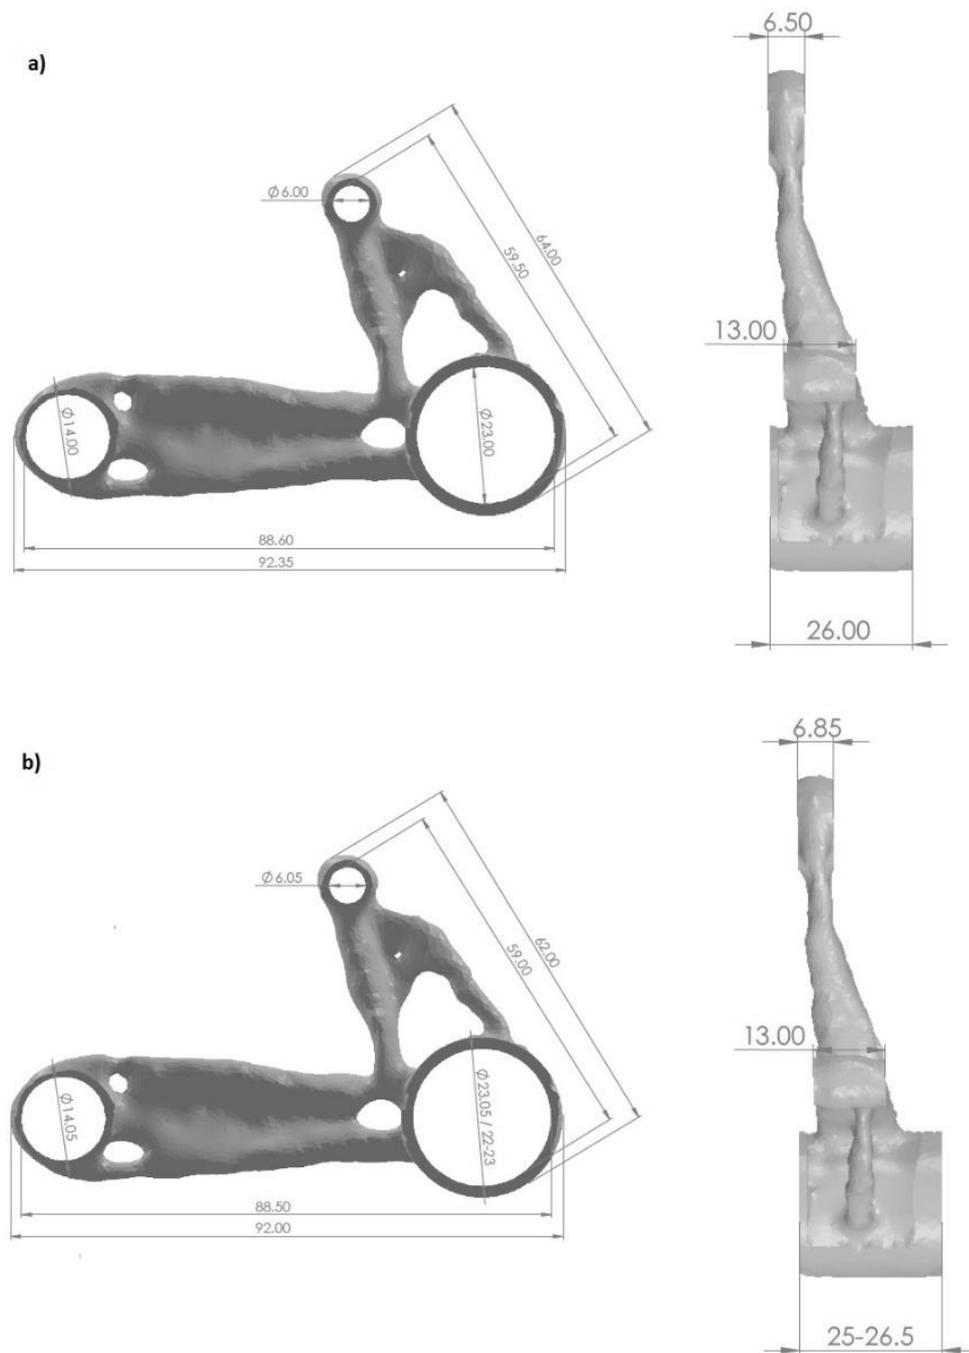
Geometrical deviation of manufactured part; a) nominal dimensions; b) actual dimensions
